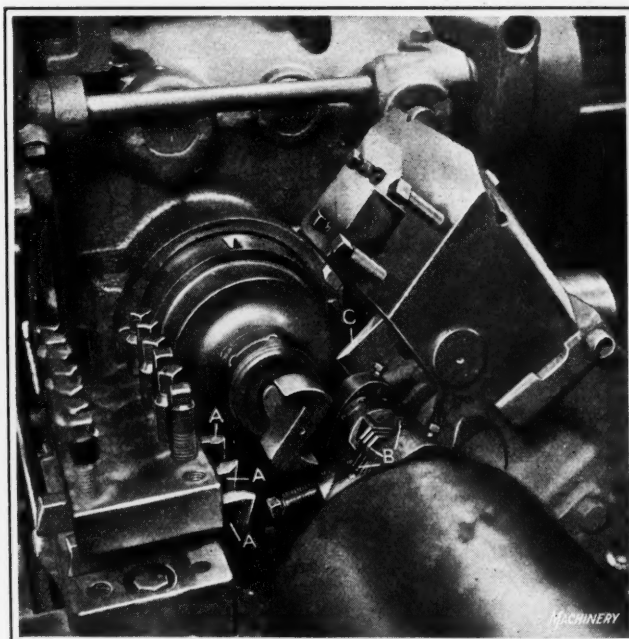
Fay Automatic Lathe equipped for turning Outside Diameter, finishing Ring Grooves, and facing Closed End
